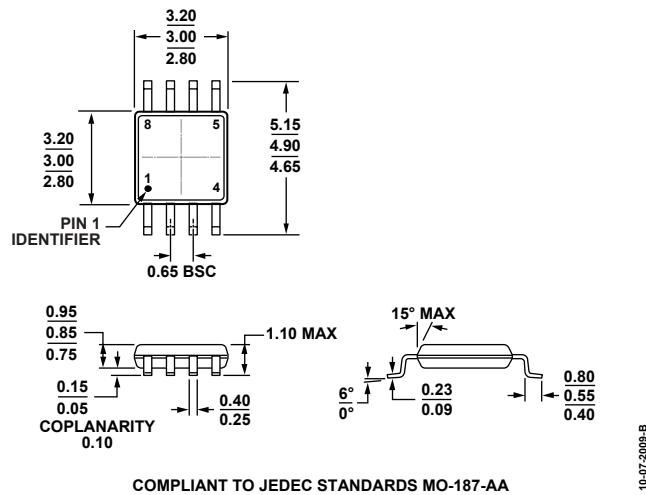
8-Lead Mini Small Outline Package [MSOP] (RM-8) Dimensions shown in millimeters
